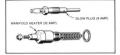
GLOW PLUG AND MANIFOLD HEATER
